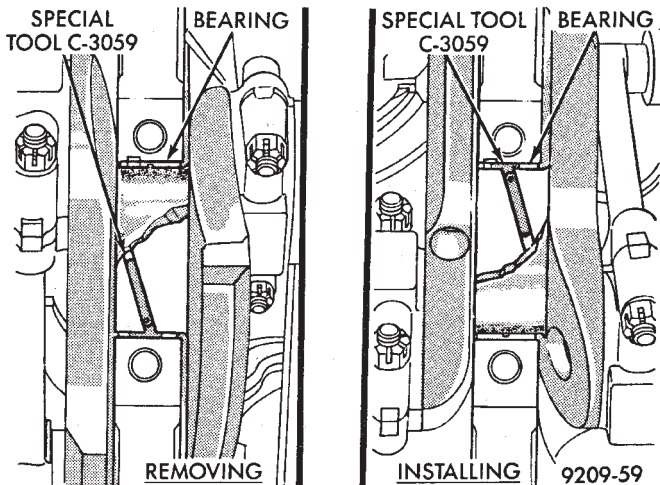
Removing and Installing Upper Main Bearing With Special Tool C-3059
